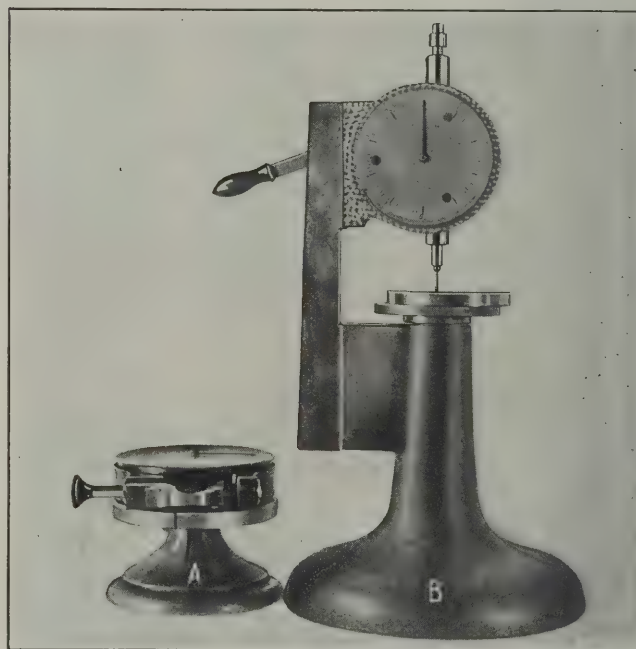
Upright and "Fine" Multiplying Gages used for measuring the Various Parts of a Watch during Process of Manufacture
